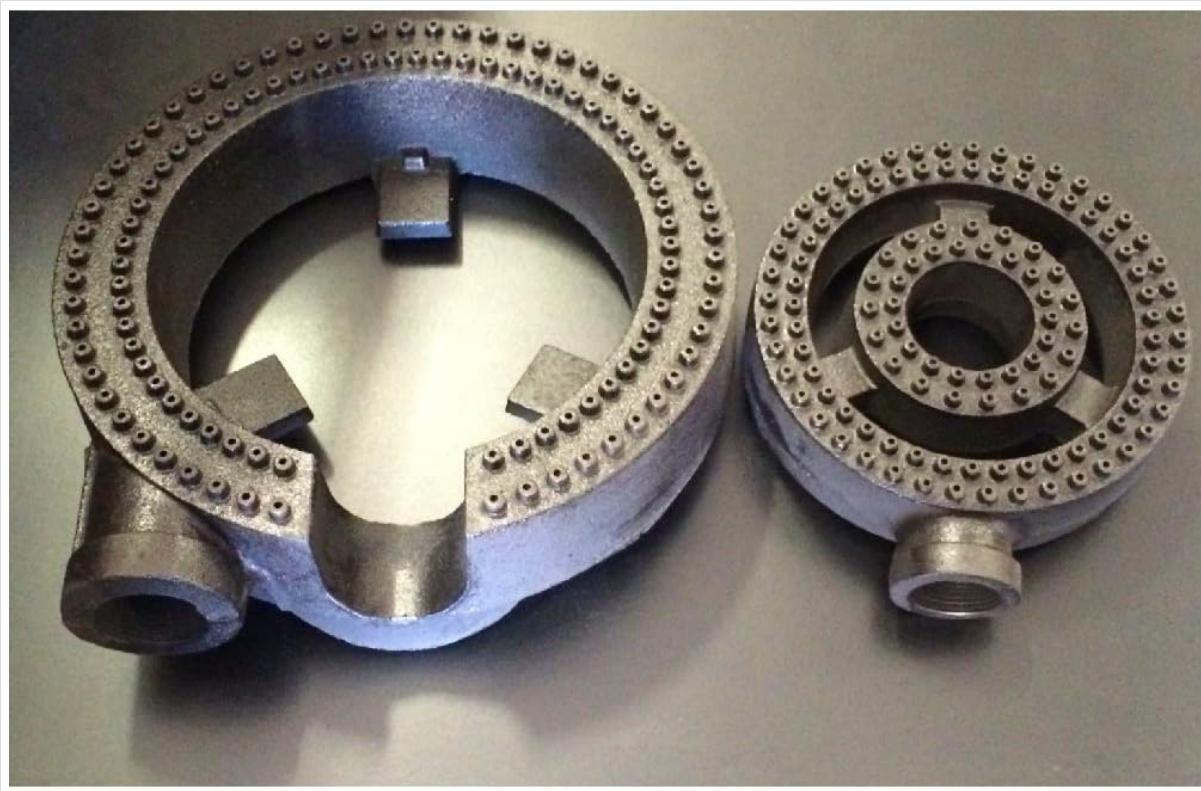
Disassembled view of the GSW 3-Rings Burner showing the main body and the inner ring component. This illustrates how the burner is constructed and where connections are made.
